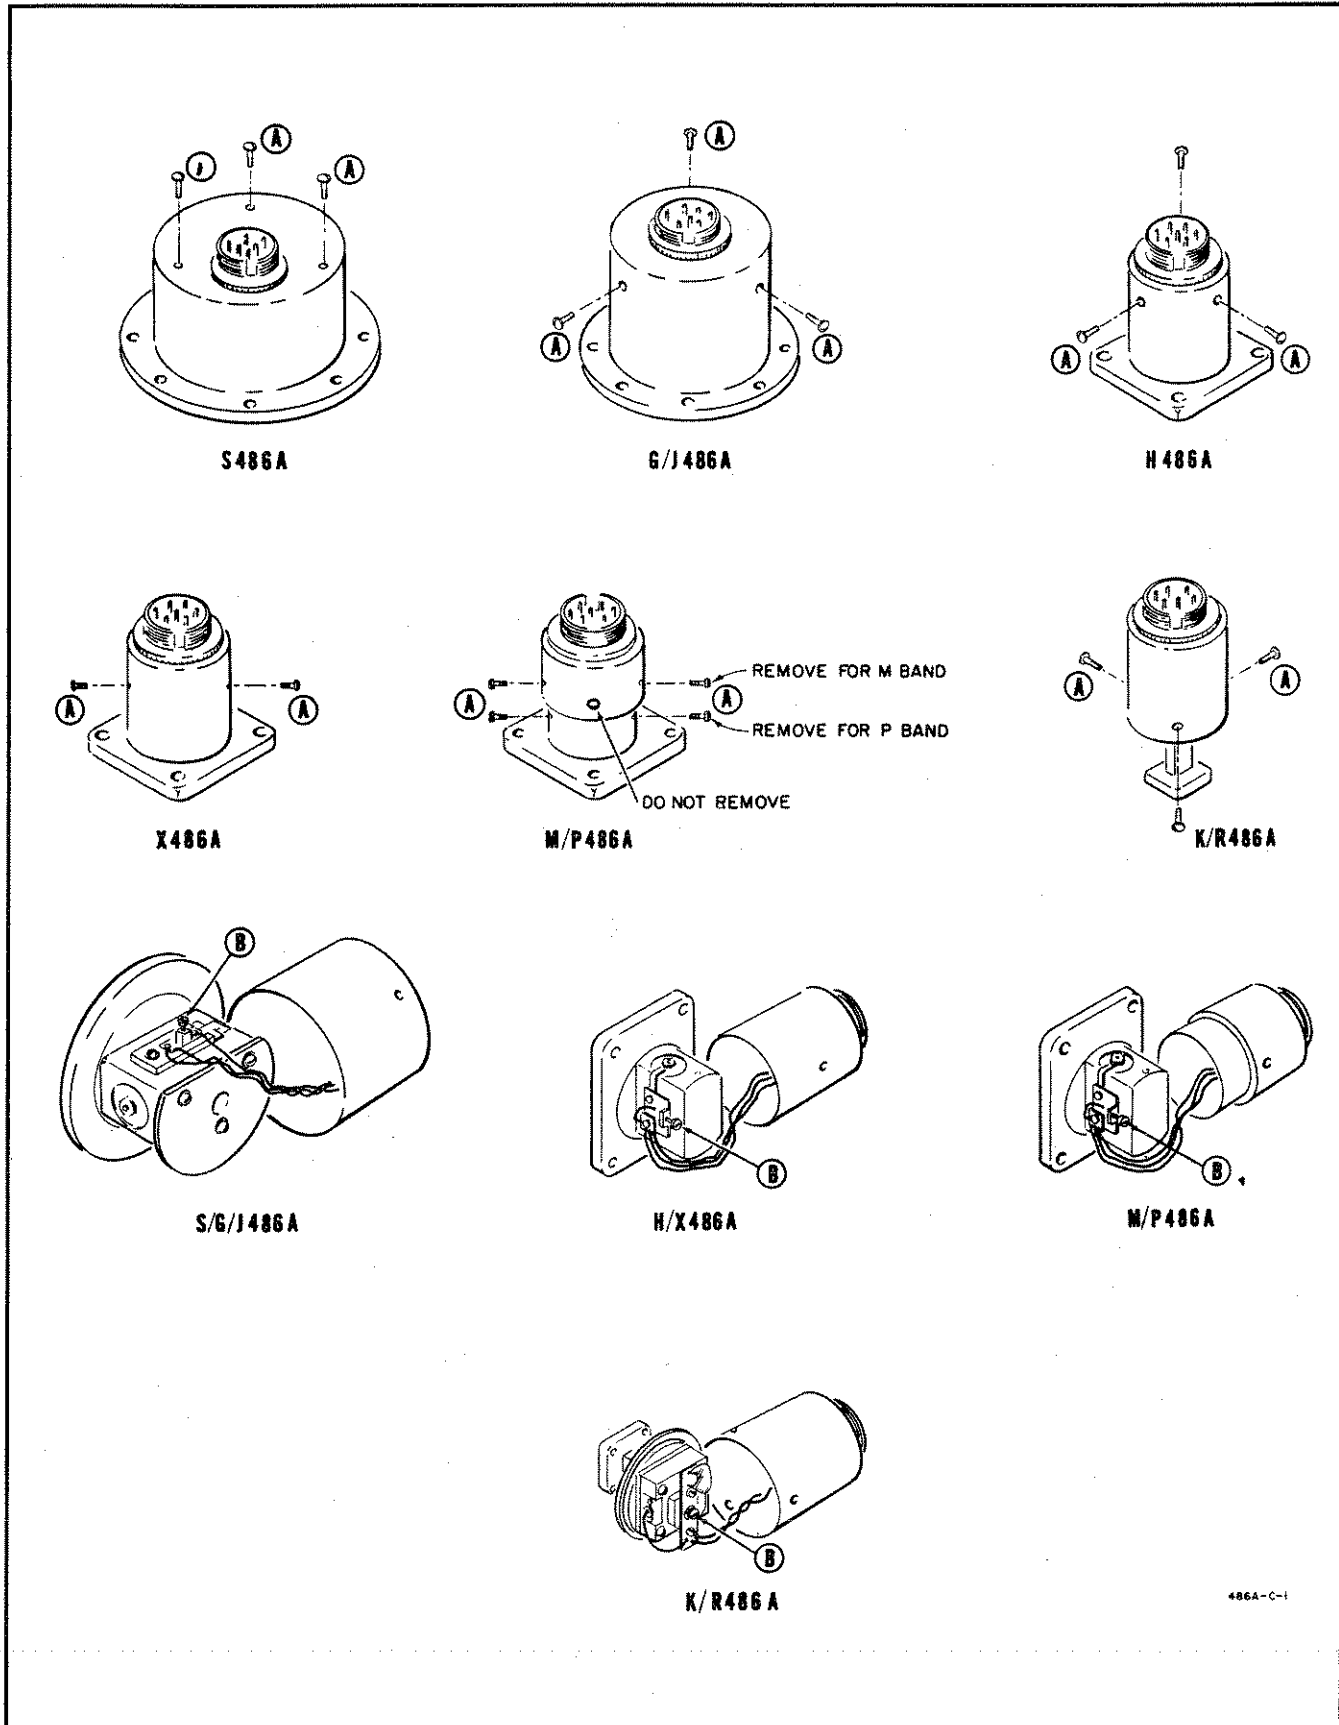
Cover Screws (A) and Compensating Screws (B) in Model 486A Thermistor Mounts
